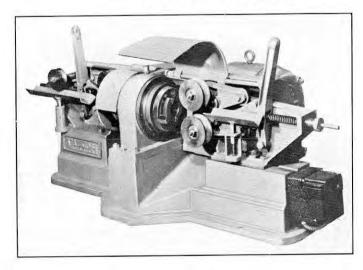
Dowel and End-Forming Machine; F. J. Edwards, Ltd.
